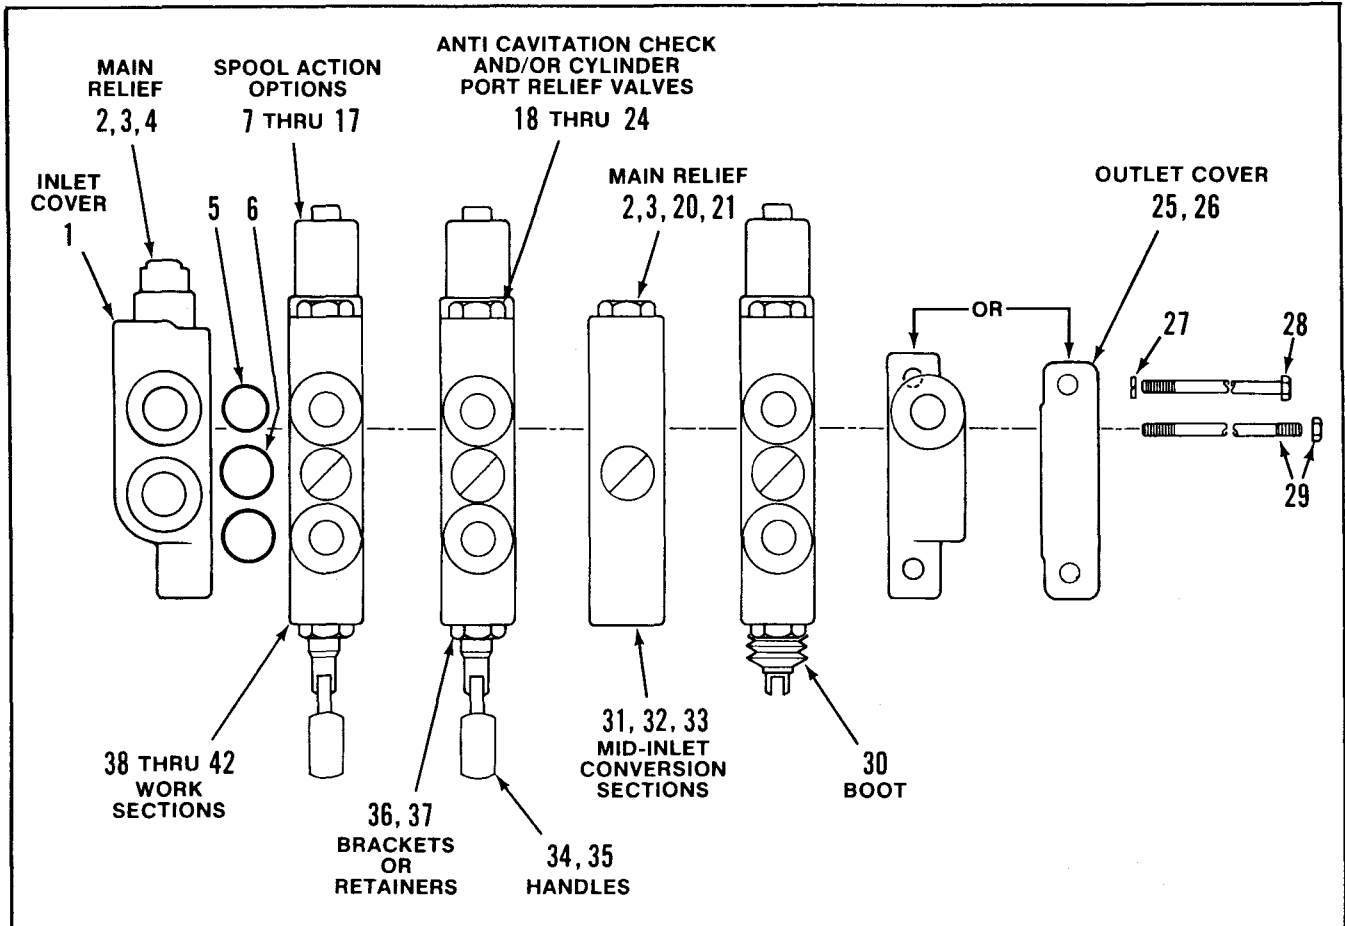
Model V42 Directional Control Valve, Typical Main Assembly.
